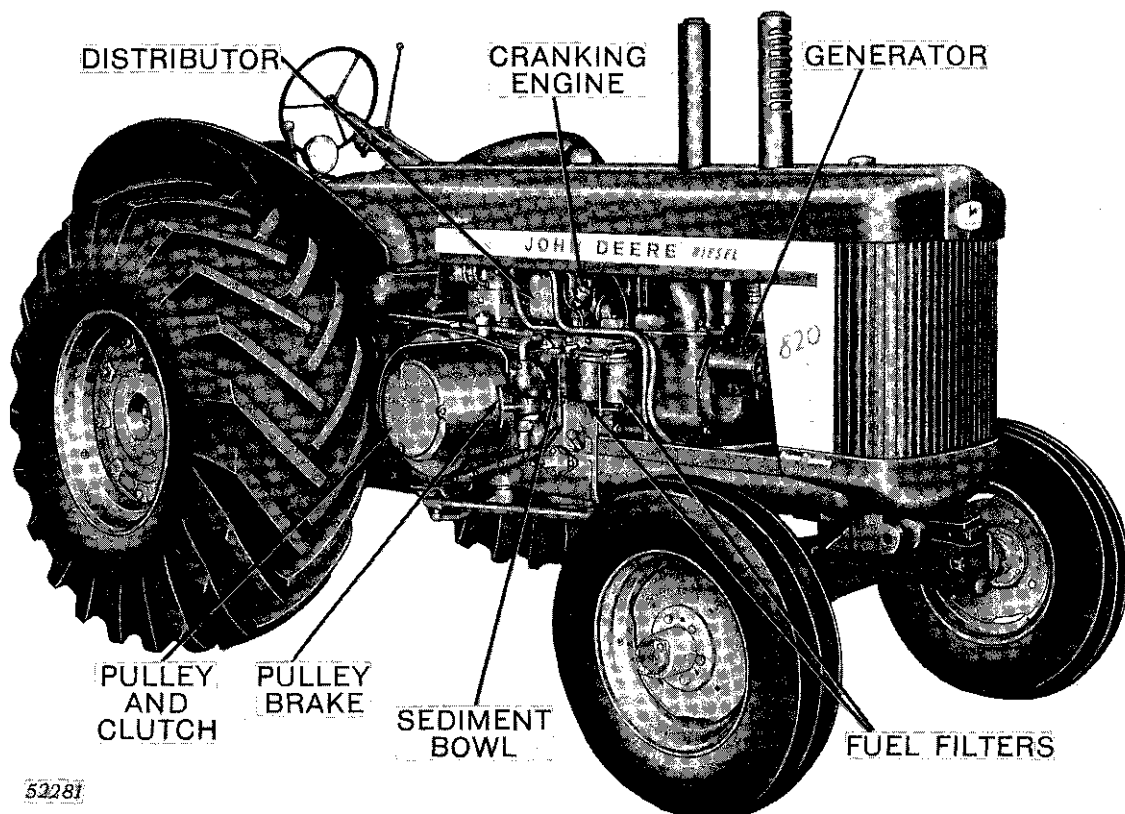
John Deere "820" Series Diesel Tractor—Pulley Side
